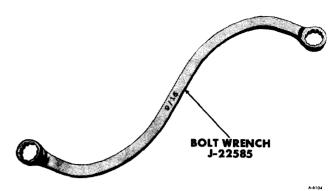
Front Hub Retainer Bolt Wrench J-22585
